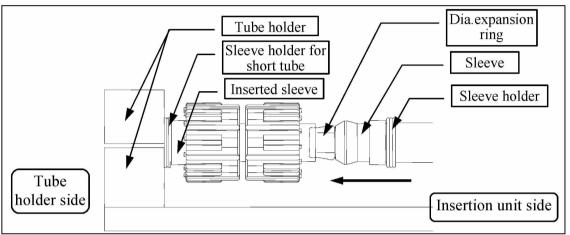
Parts arrangement (6, 8, W2, W2Y, W3Y)
